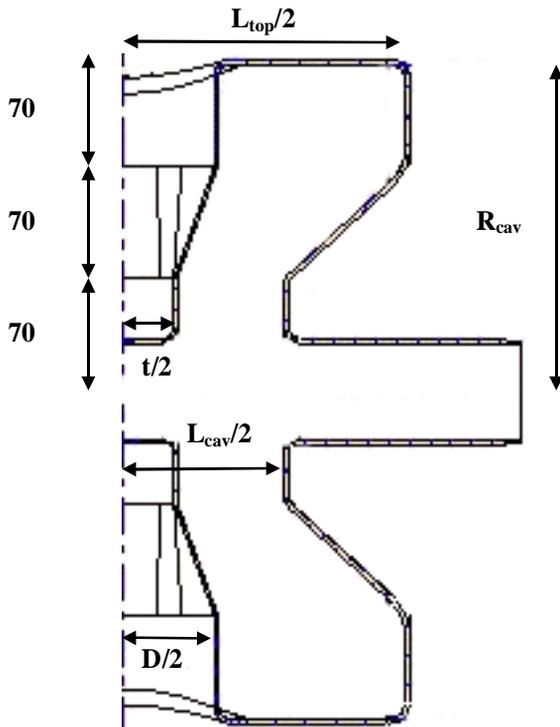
Cross-section of the half spoke cavity (dimensions in mm)
